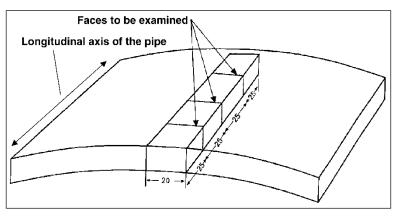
Seamless Pipe and Parent Metal of Longitudinally Welded Pipe (All Dimensions in mm [1 in = 25.4 mm])
